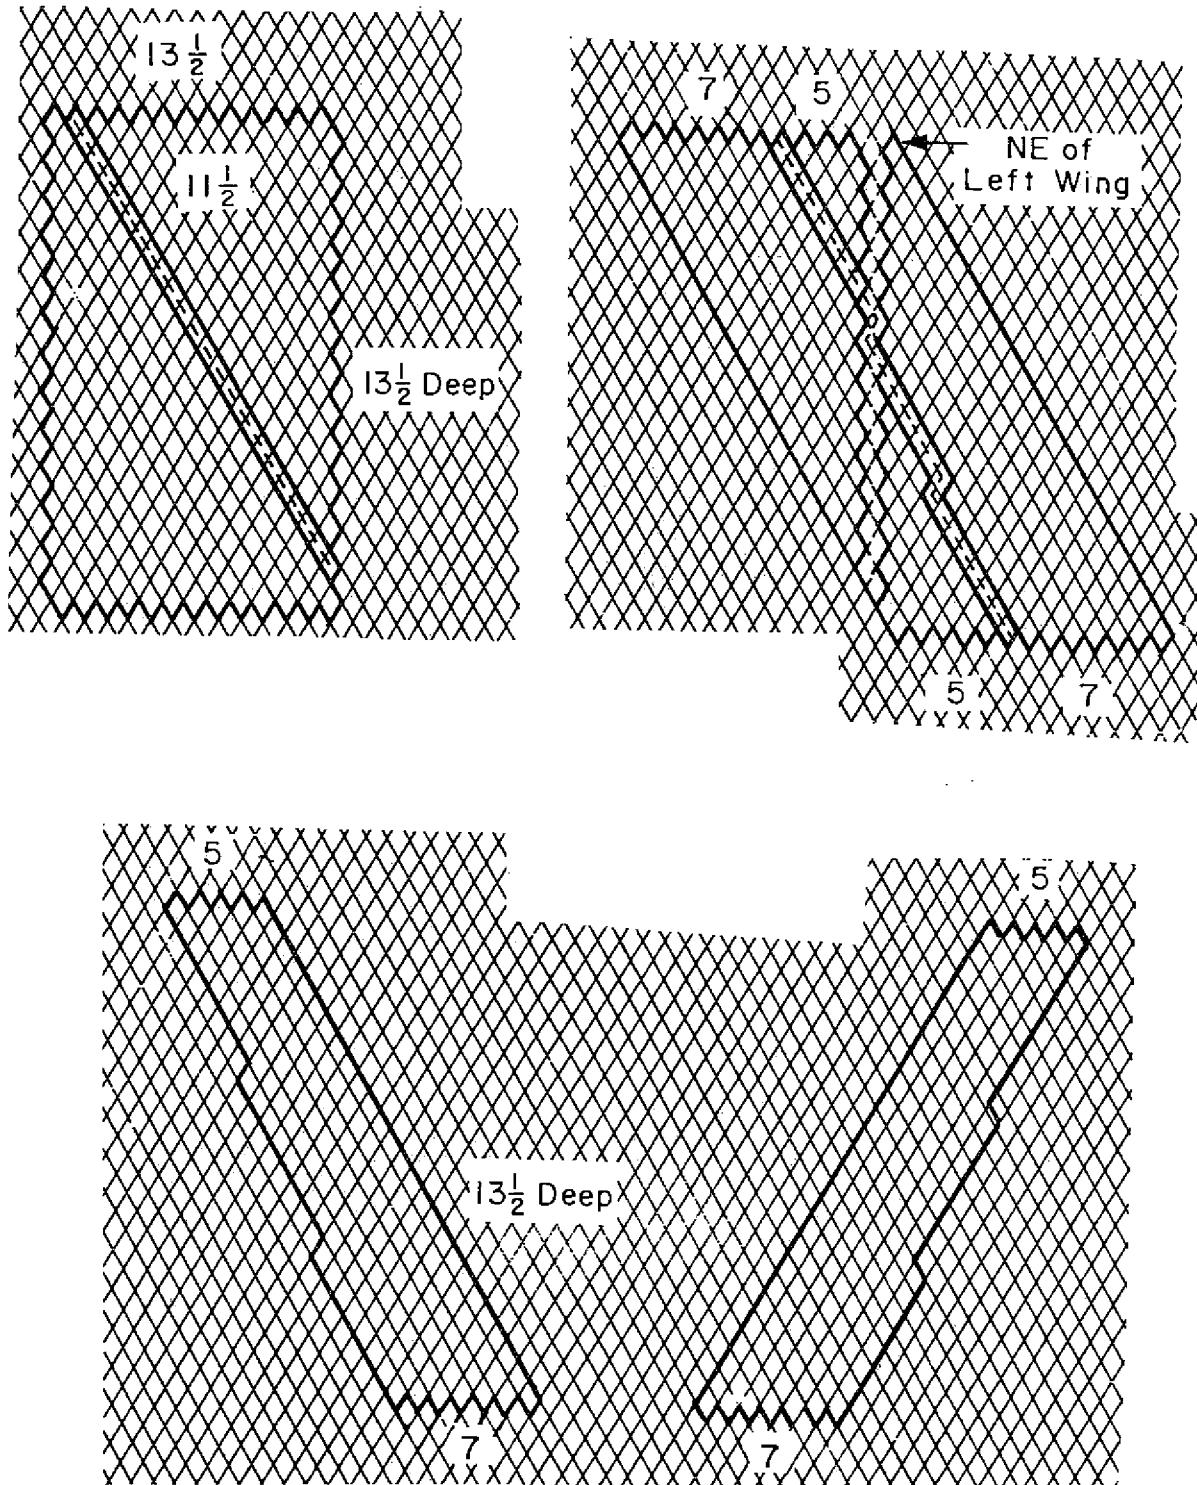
Cutting and assembly of a pair of lower wing sections for a model Yankee trawl net.
